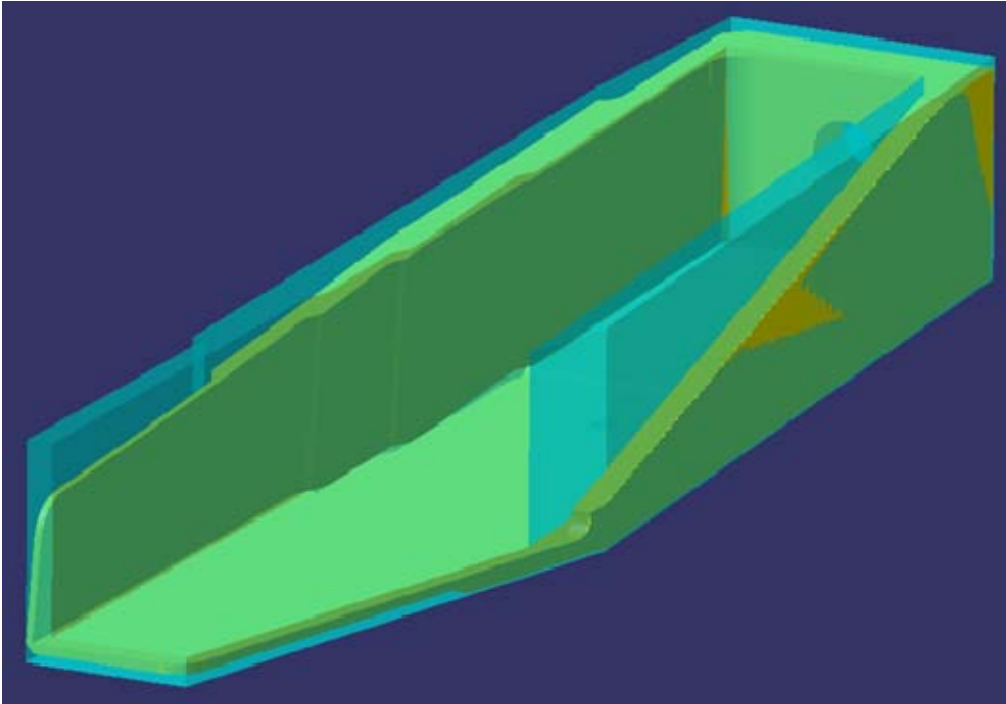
SSJ initial stock and engineering part *515-3 paired in Catia V5.
